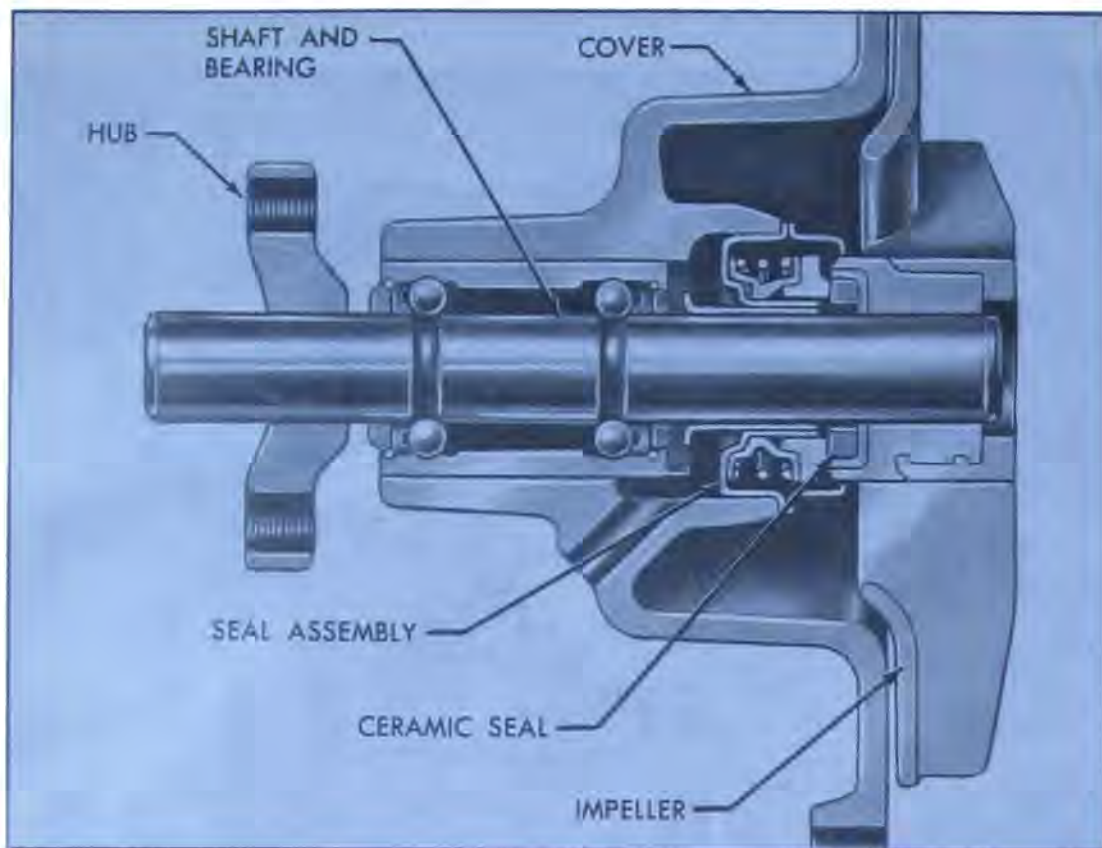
Water Pump Cover Assembly (Cross Section)
